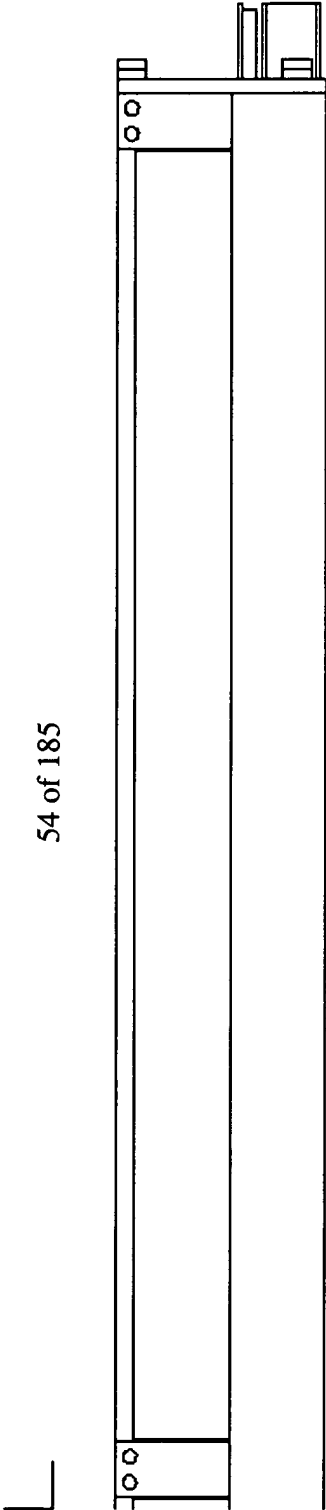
B: Front view of the left end of a floor frame (40 foot high cube collapsible cargo container)
